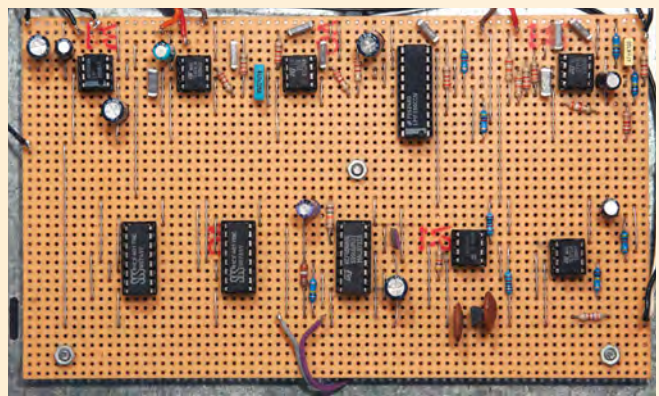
The top side of a circuit board based on a piece of stripboard. The copper strips run horizontally on the other side of the board
